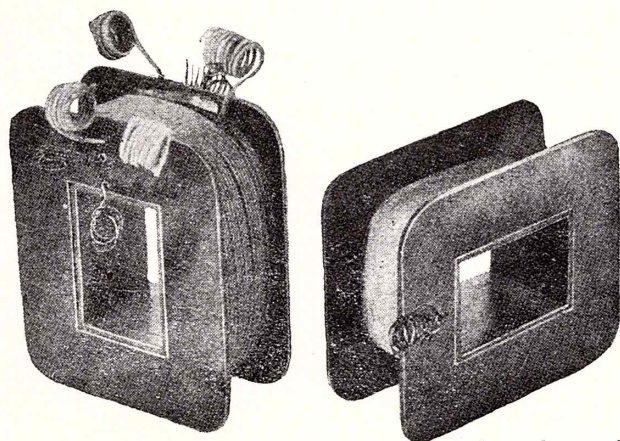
The two bobbins; one finished, the other only partly wound. Note the method of finishing off the thick wire coils.
